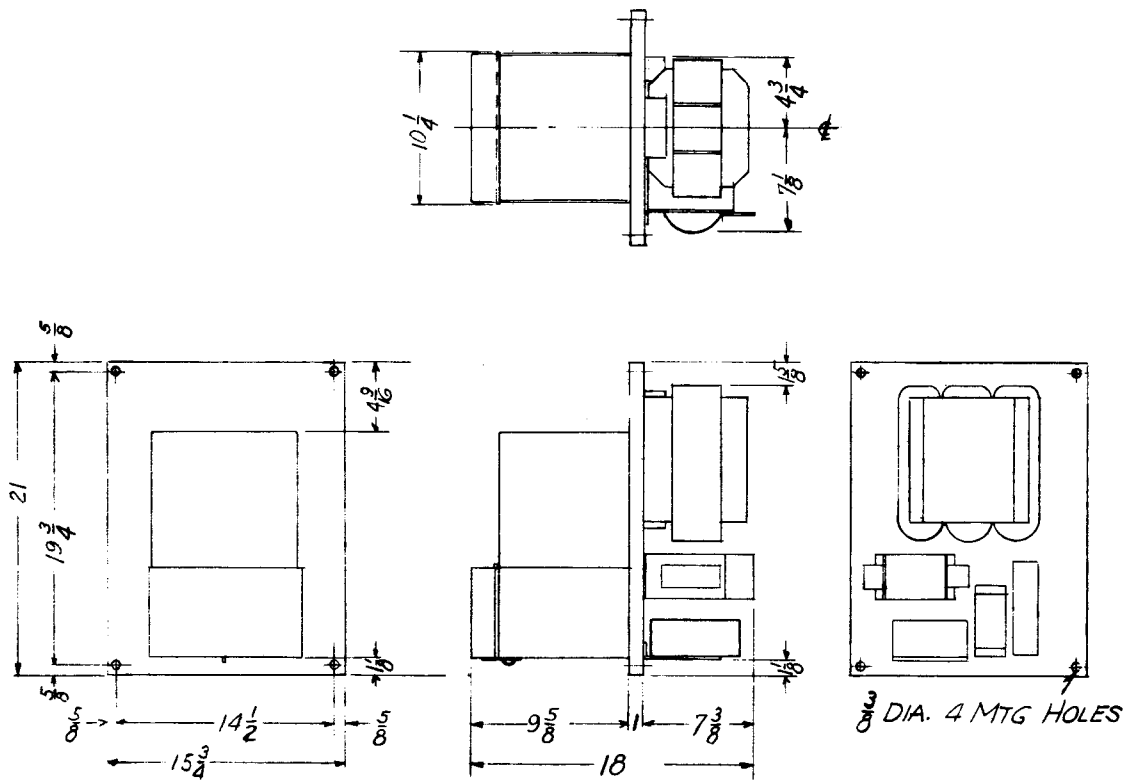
Outline Drawing for DT-5 Voltage Regulator
